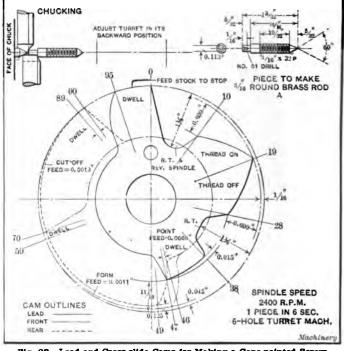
Lead and Cross-slide Cams for Making a Cone-pointed Screw having a Hole drilled in the Rear End
